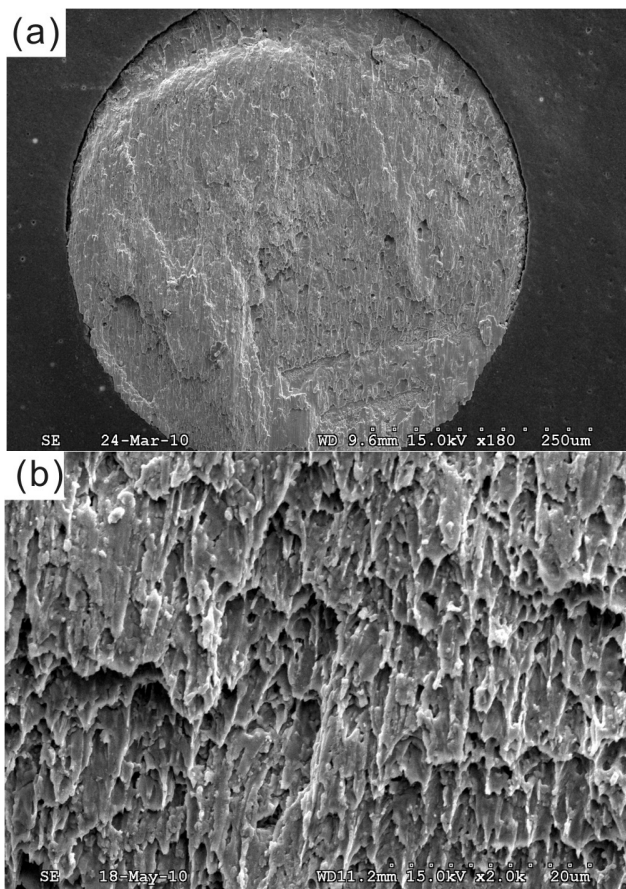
Fractography of the Sn3.5Ag0.5Cu-1TiO<sub>2</sub> nano-composite solder joints in BGA packages after ball shear tests [58].
